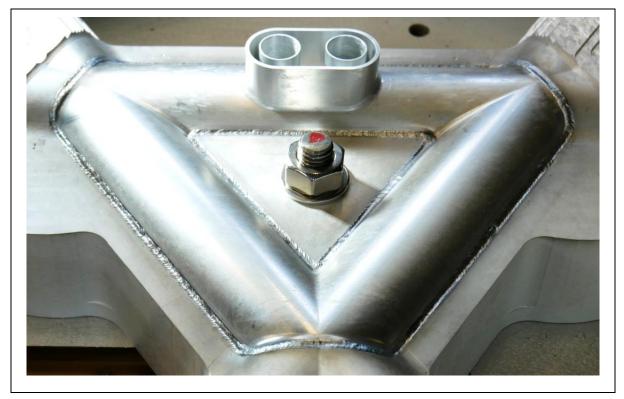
Vacuum vessel assembly after the final welding
